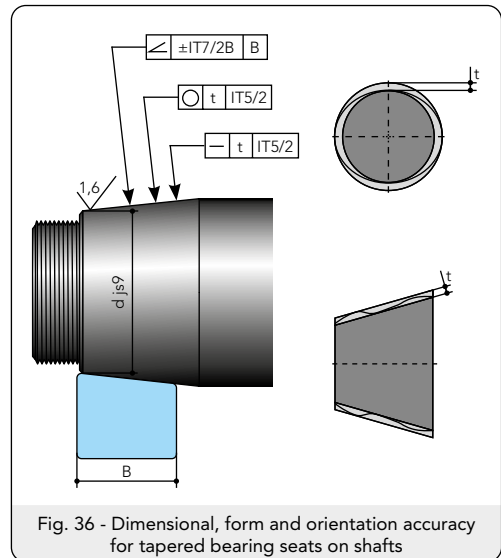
Dimensional, form and orientation accuracy for tapered bearing seats on shafts
